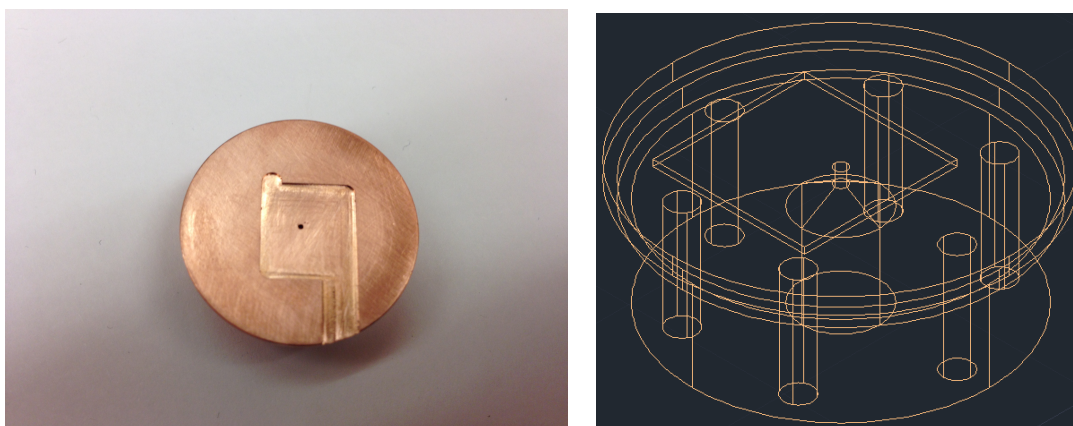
A photo detailing the facial divot where the diamond membrane will be soldered (left) and an AutoCAD schematic of the copper window frame (right)
